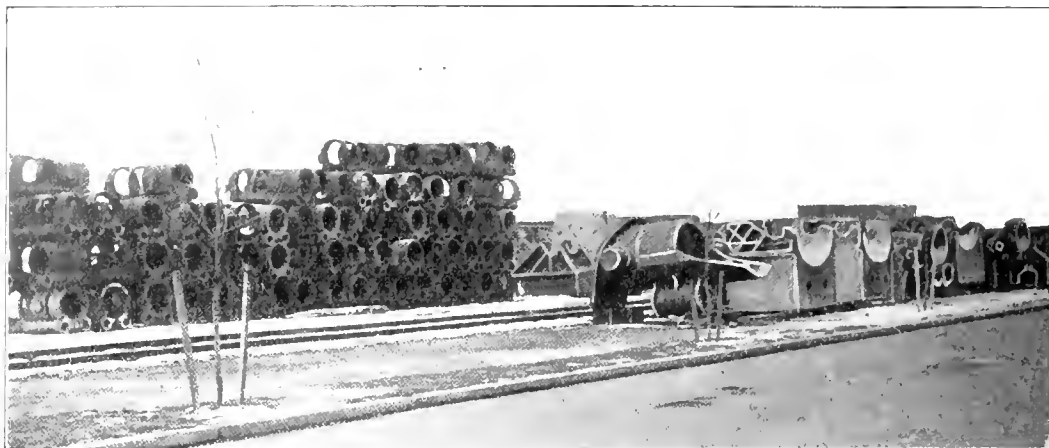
Pile of Heavy Castings for Gun Mounts.
